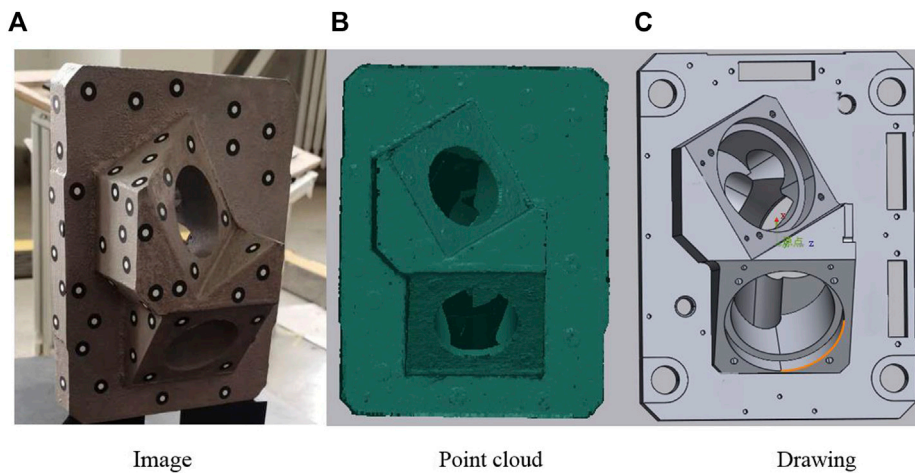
Workpiece used for the experiment. (A) Workpiece. (B) Point cloud of the workpiece. (C) 3D designed drawing of the workpiece.
